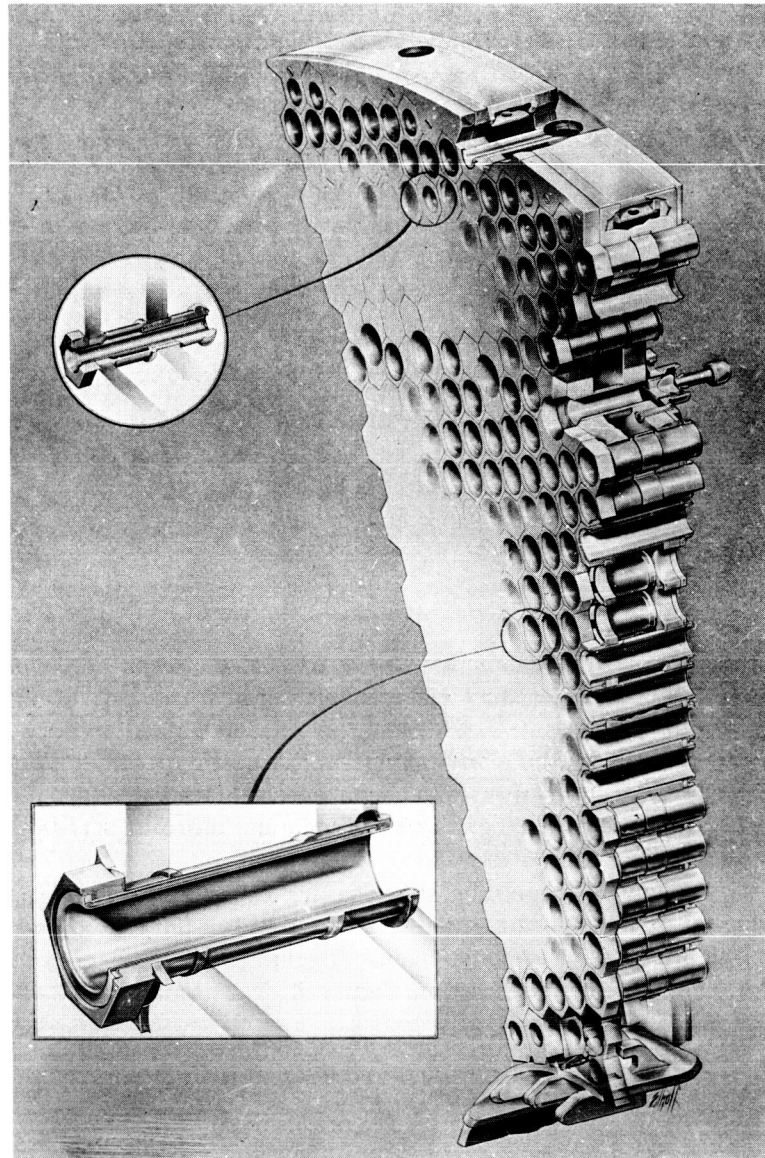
Sector of aft-retainer assembly (Neg. DI-533)
